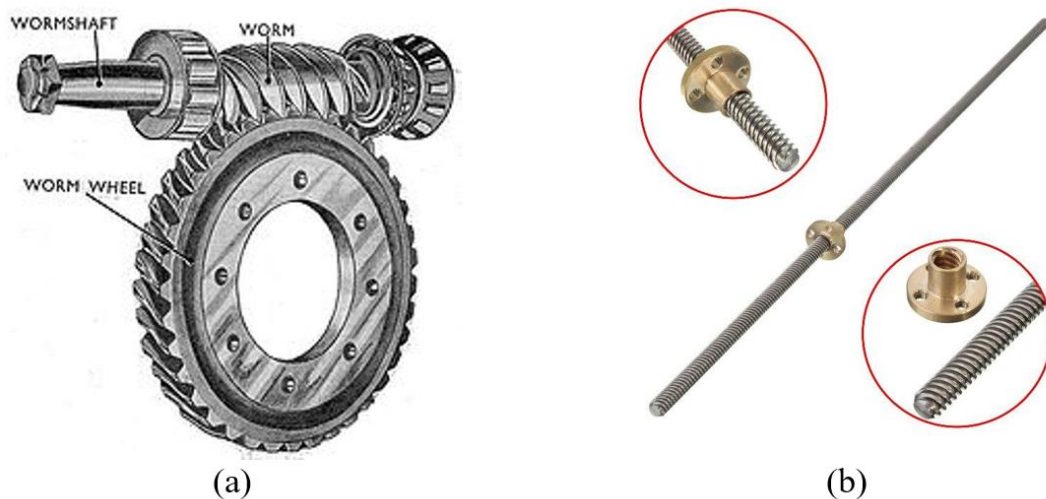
Typical image of. a) worm-and-wheel gear and b) lead screw
